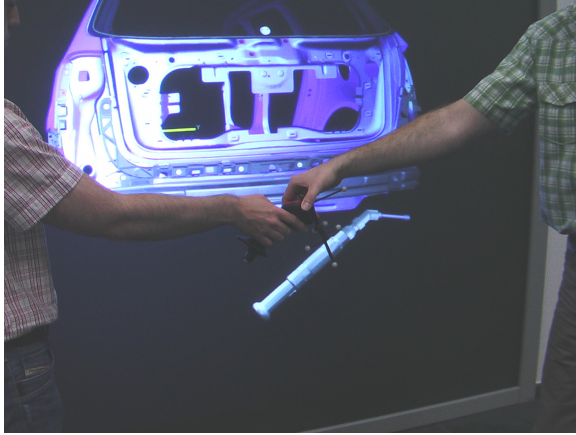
The users are able to hand over a virtual tool that is mapped onto a tracked flystick while investigating several screw mountings.
